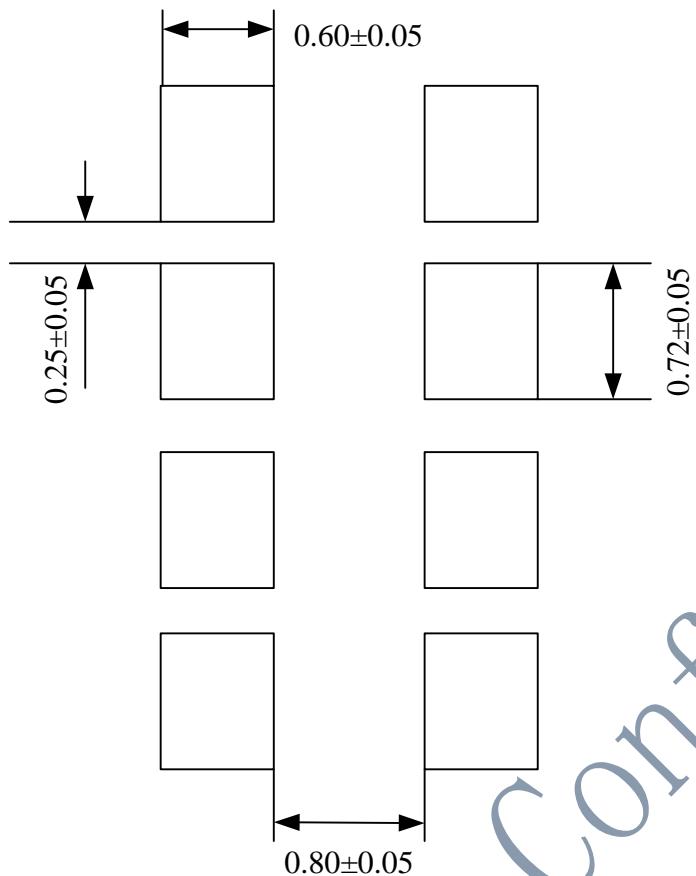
PCB layout design guide (all linear dimensions are in mm)
